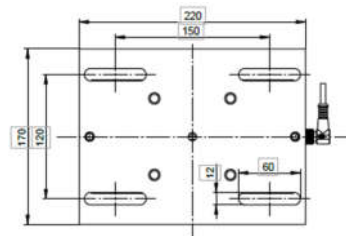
Ceiling installation system – flanged plate (dimensions in mm)
